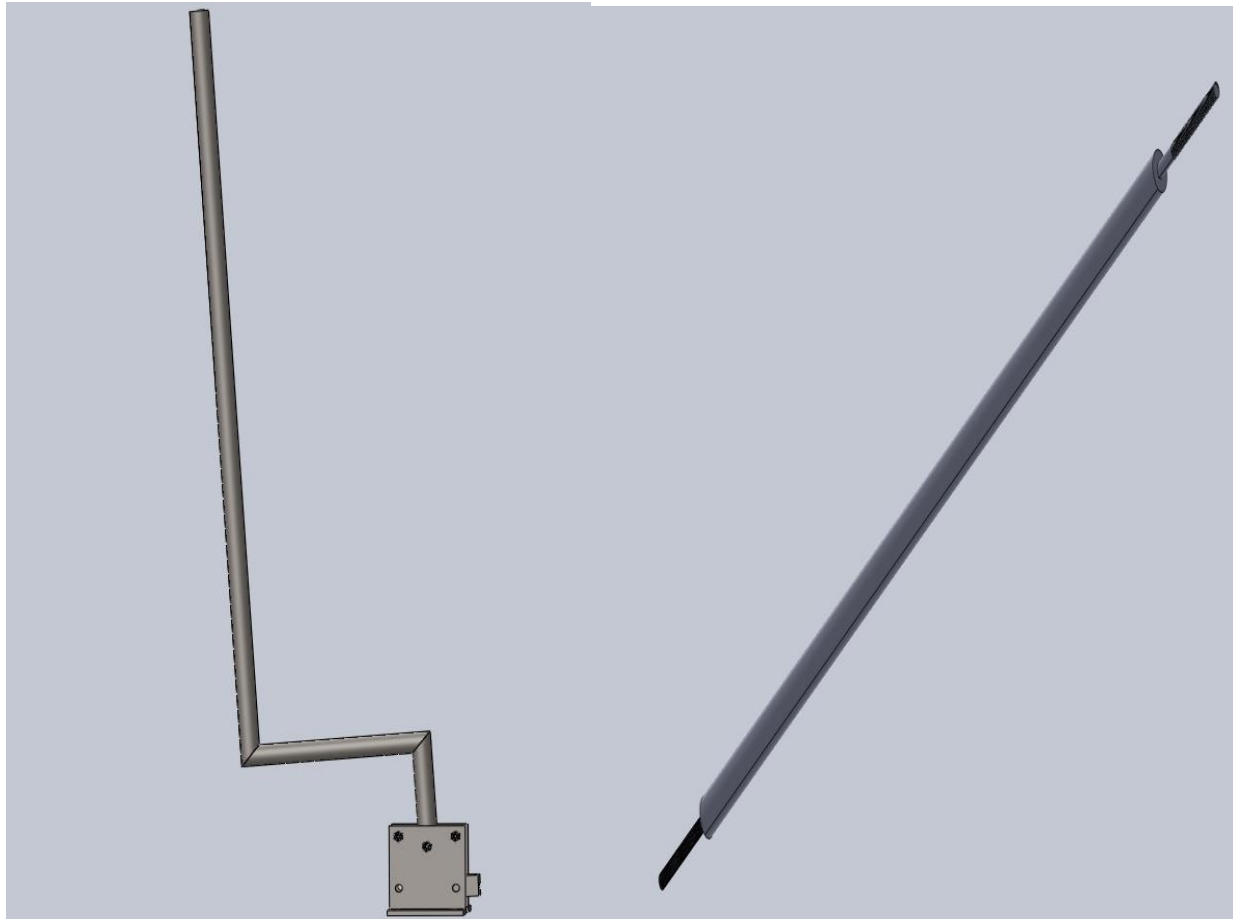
3D model of Gear Shifter Lever and Base assembly (left) and Connecting Rod (right), without handle and trigger
